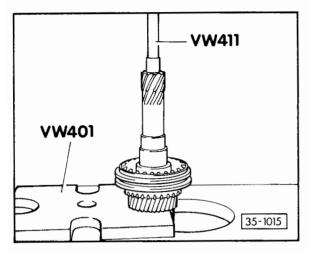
Pressing sleeve and synchronizer hub off together with 3rd gear wheel
